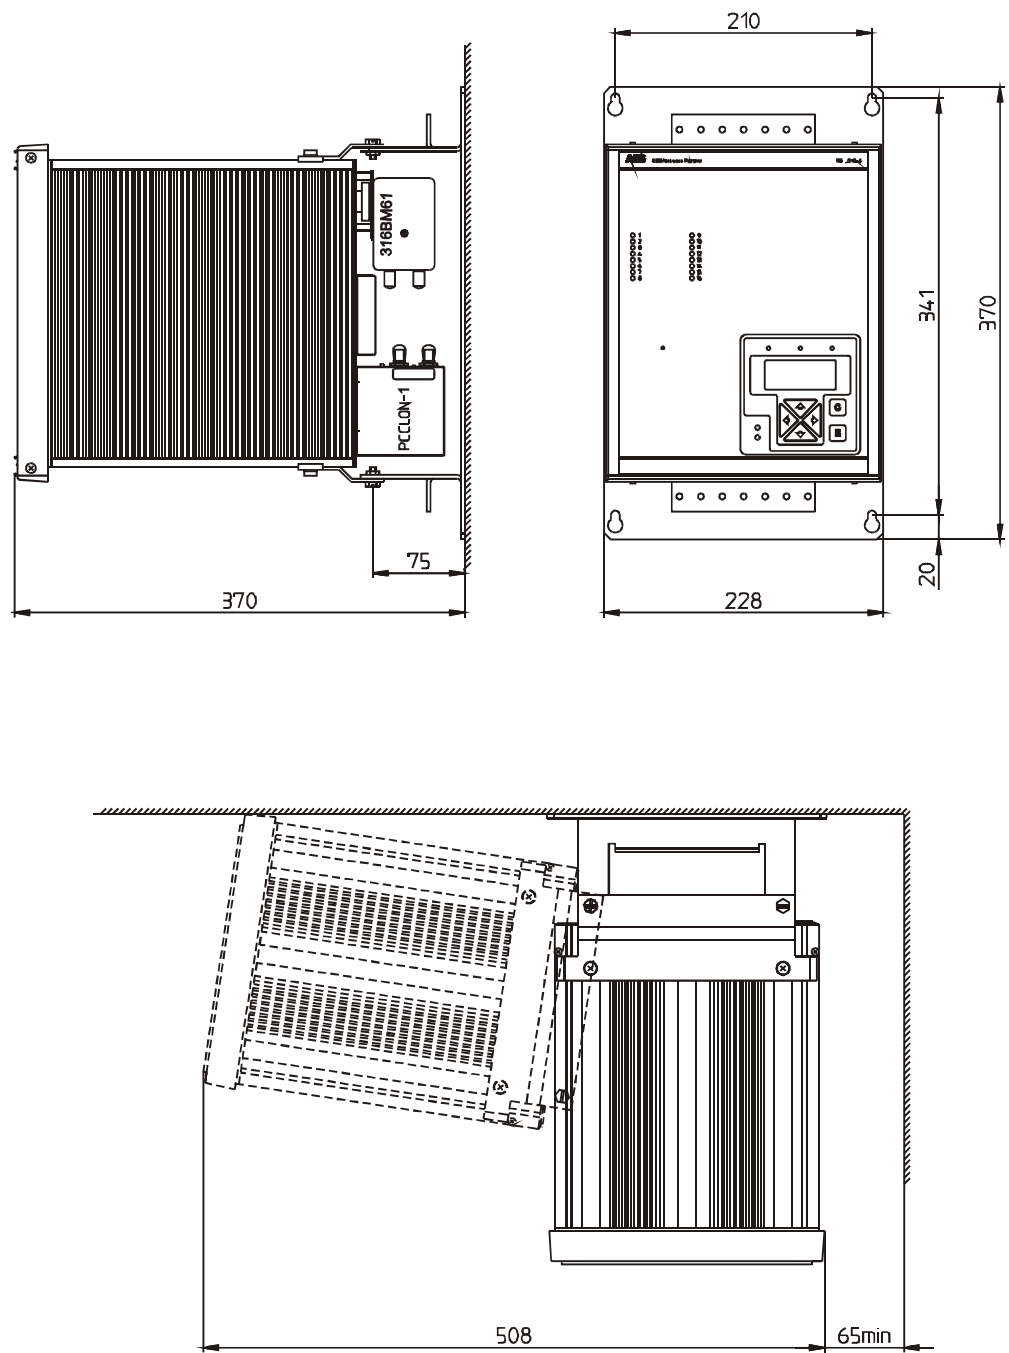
Surface mounting, casing able to swing to the left, rear connections. Size N1 casing
